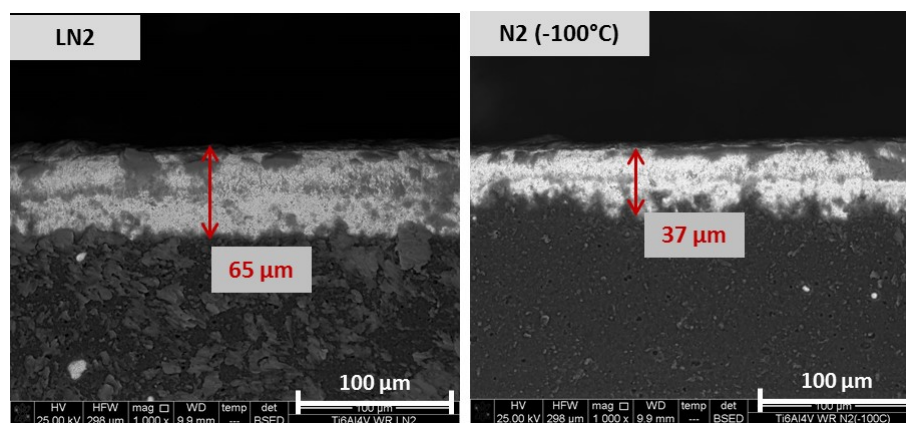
Tool flank wear after 15 min of turning when using LN2 and N2 cooled at -100°C .
